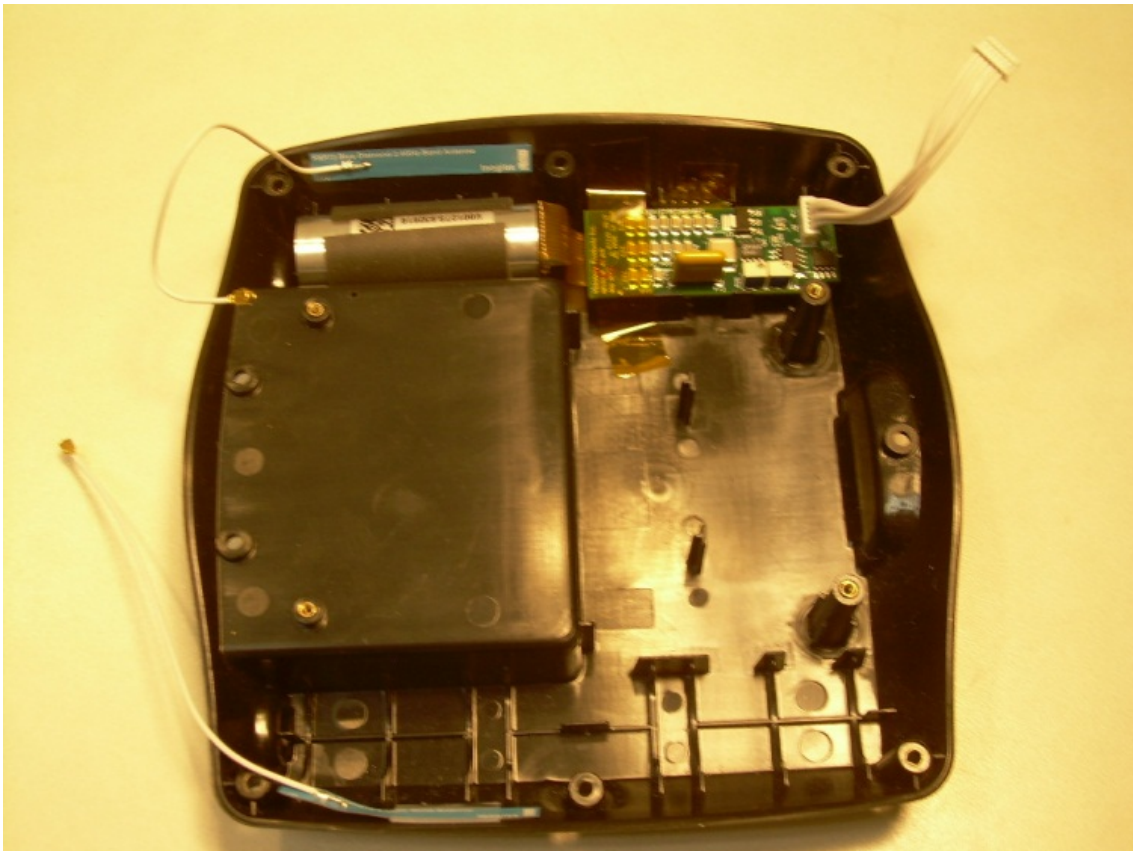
View of the Scintillation Tube and Component Side of the PCB
